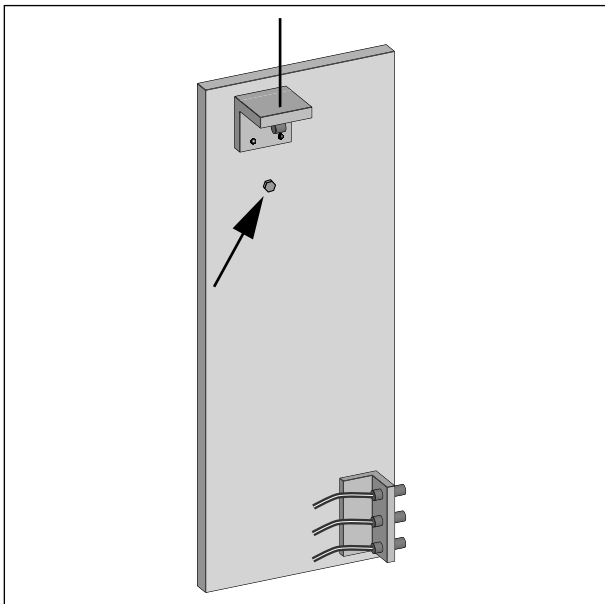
Screw securing the carriage for the snap-off distance switches during machine transport
